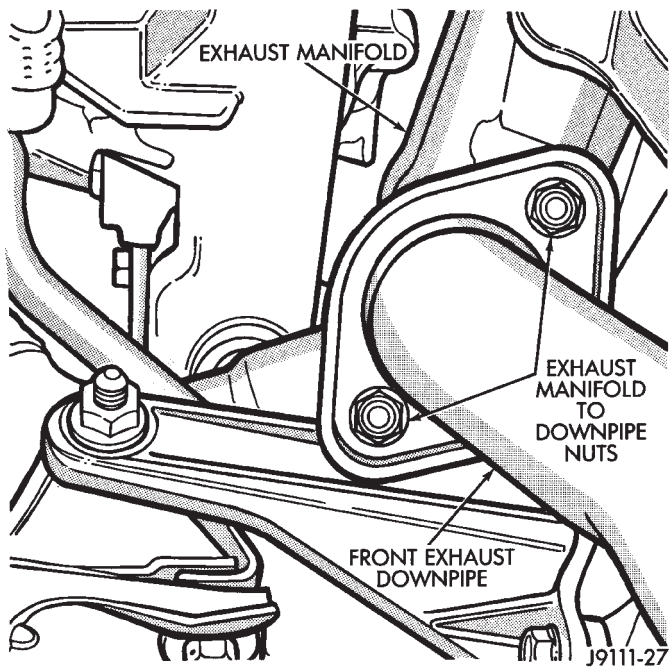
Exhaust Pipe-to-Engine Exhaust Manifold Nuts
